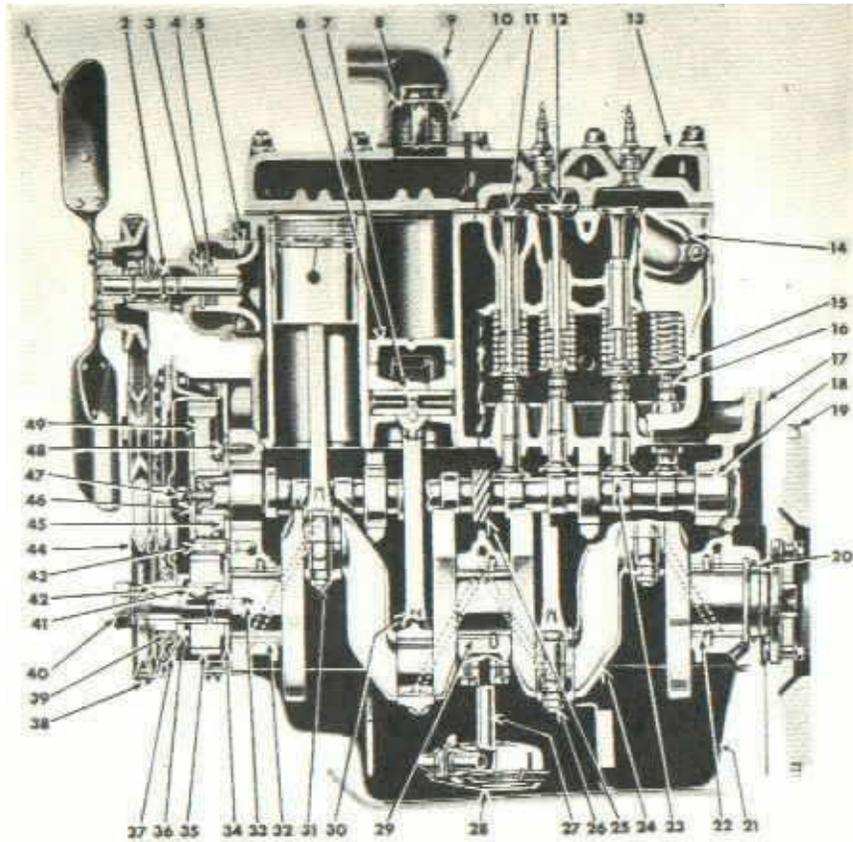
SIDE SECTIONAL VIEW OF ENGINE.
